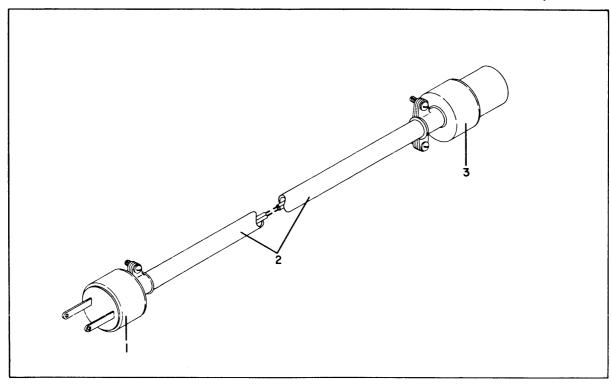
Electrical Power Cable Assembly, CX-3974/U
